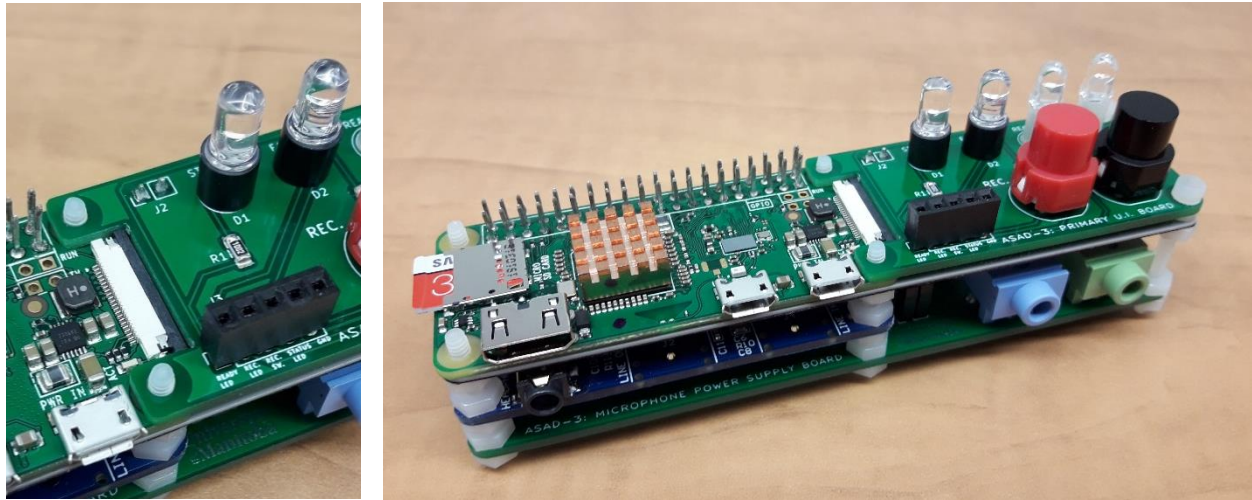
Illustration of fit-up of Primary User Interface Board to Raspberry Pi (left) and overall view of the Audio Recorder with Advanced User Interface Removed (right).
